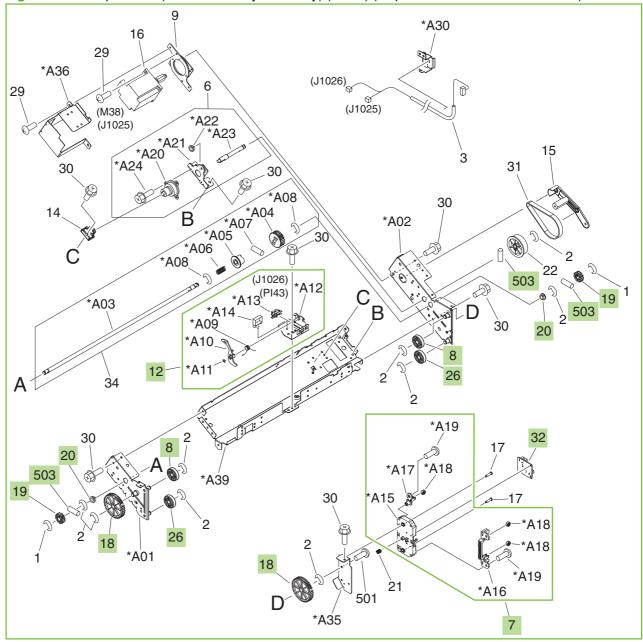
Output bin 2 (stack lower-tray assembly) (2 of 2) (stapler/stacker and booklet-maker)
